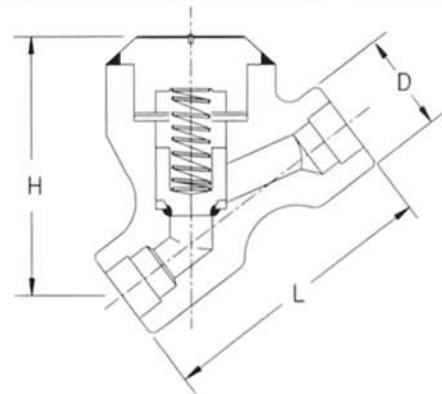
S-FS3 - WB - Y Class 1500 (Socket Weld)
